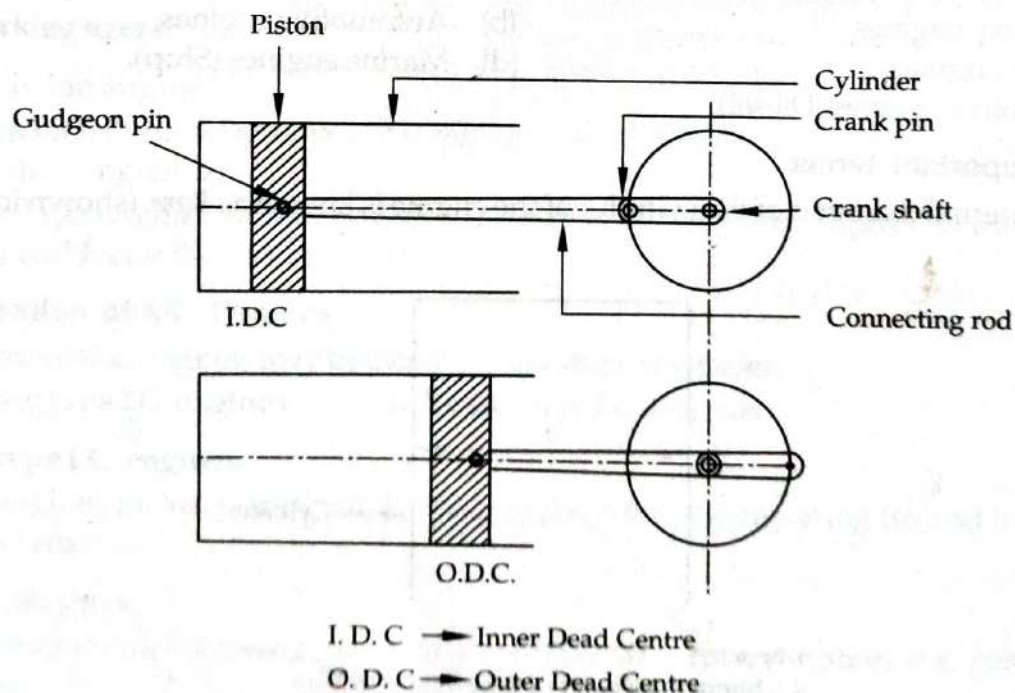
Horizontal Cylinder Engine showing, I.D.C & O.D.C positions
